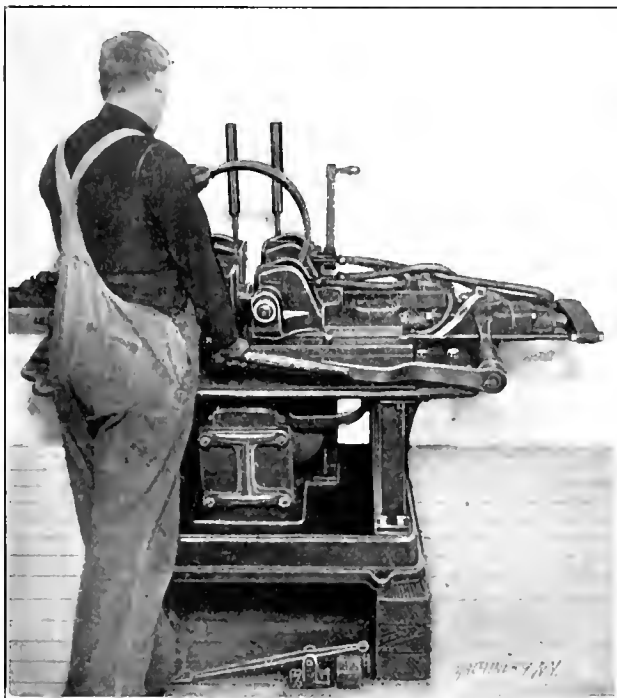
A Large Machine, operated Hydraulically. Section welded, 3 x 5-8 inch; Current, 70 K.W. for 50 seconds.
